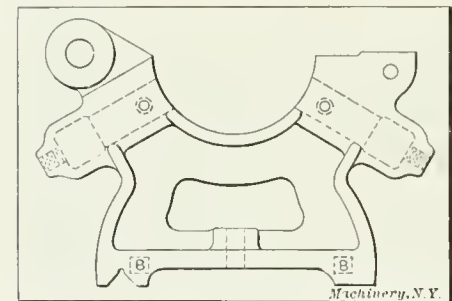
Part of Steady-rest drilled in Jig shown in Fig. 6.
